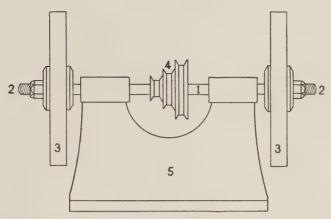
Grinding Arbor With Grinding Wheels Mounted. 1, shaft of spindle, ½ inch in diameter; 2, ends of spindle, ½ inch in diameter; 3, grinding wheels, 1 inch thick, 8 inches in diameter; 4, step pulley; 5, heavyduty base.
